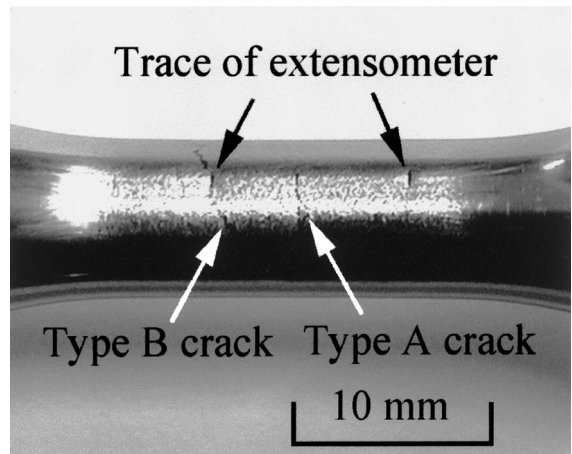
Example of fatigue cracks on specimen surface. ( $\Delta\epsilon_t$ ; 1.6%).
